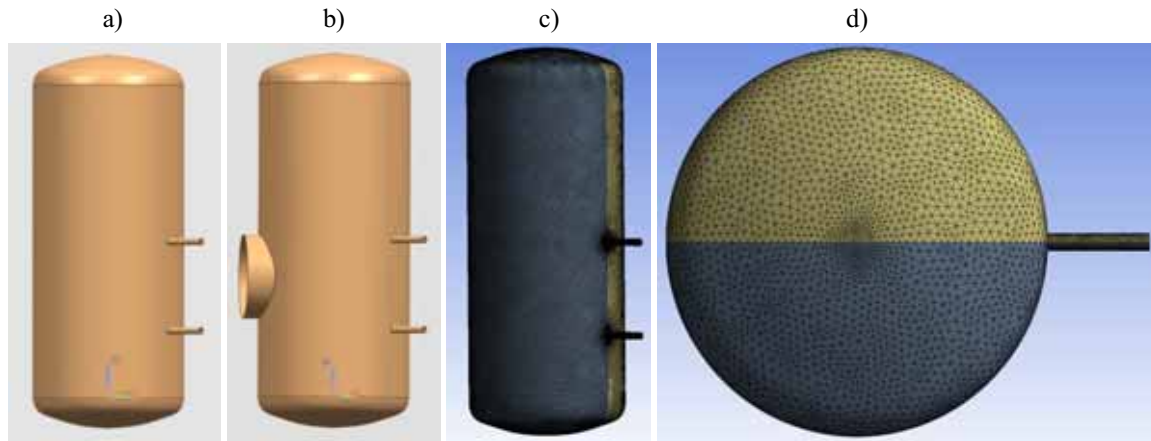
The storage tank with (a) and without (b) inspection opening and its tetrahedron meshing in side view (c) and top view (d)
